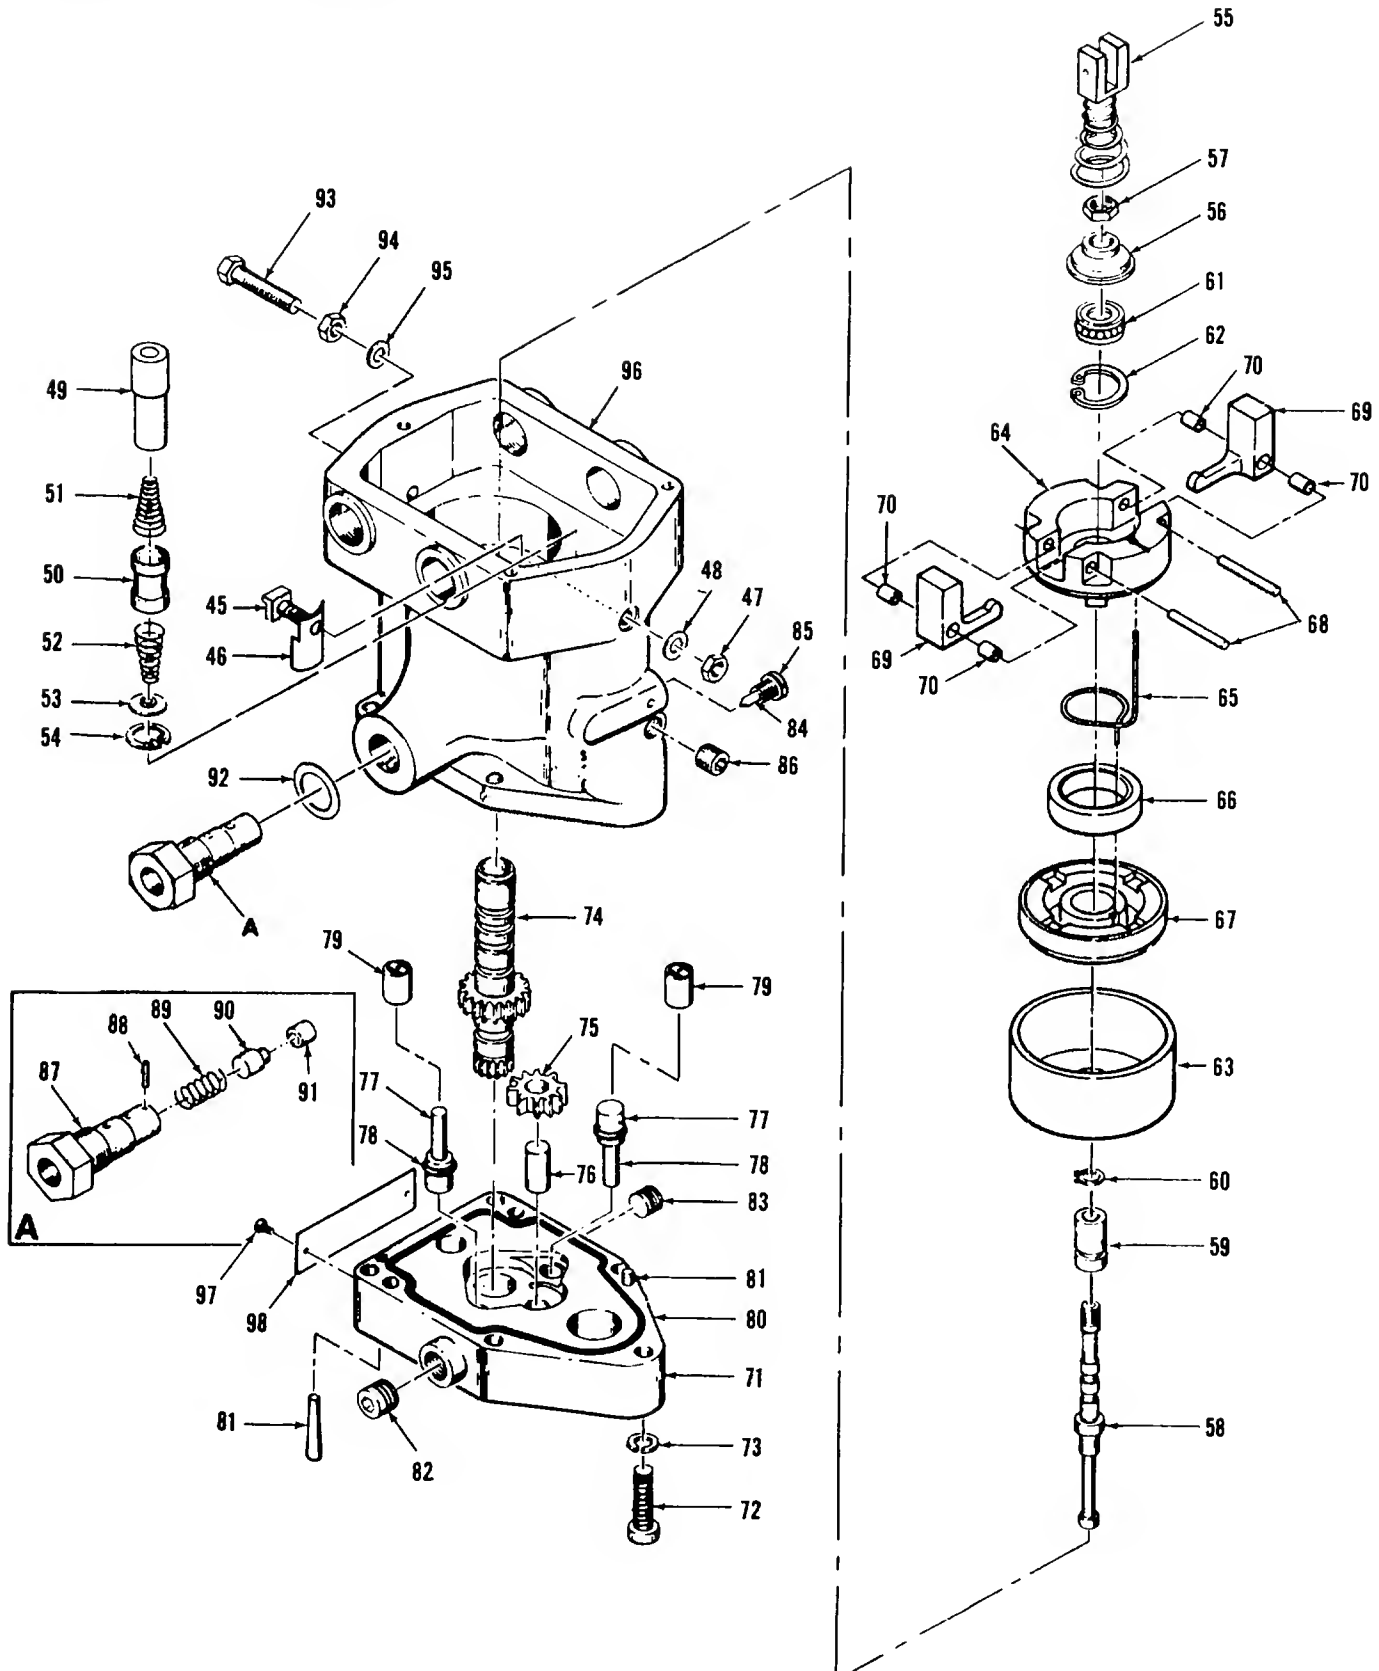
Governor, Exploded View (Sheet 2 of 3)
